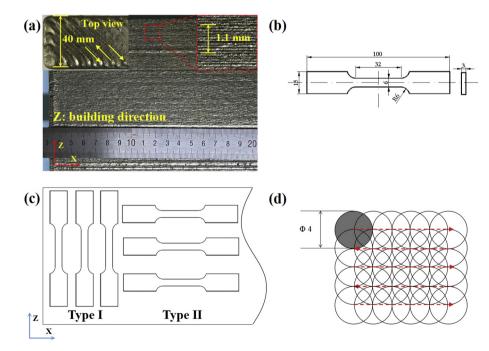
(a) As-printed Ti6Al4V wall; (b) Dimension details of tensile test specimen; (c) Sampling schematic of tensile test specimen; (d) Schematic diagram overlapping rate.
